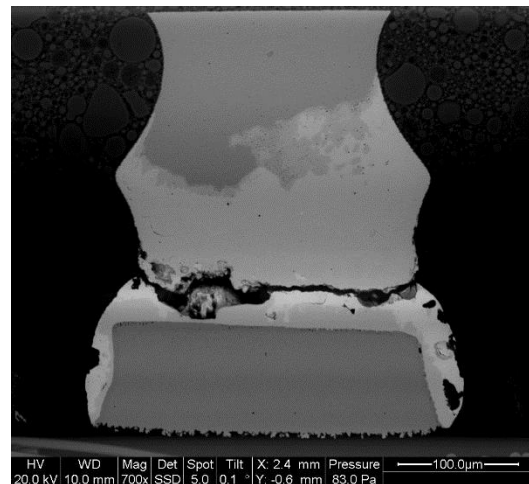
shows the failure of SAC305+0.07%Ce solder joints in QFN44 and R2512 packages. Figure 10-22 (a) and Figure 10-22 (b) show the solder joint of failed QFN44 in mechanical shock after 1000 hours of aging at 200°C. Both failed QFN44 solder joints confirm that failure occurred at the interface between  $\text{Cu}_6\text{Sn}_5$  interfacial IMC and bulk solder. Huge growth in  $\text{Cu}_6\text{Sn}_5$  interfacial IMC can be also seen in Figure 10-22 (b), along with excessive voids formed at the interface during high temperature aging which reduced interfacial strength even further. With presence of large interfacial voids and thicker  $\text{Cu}_6\text{Sn}_5$  interfacial IMC, Low Ce solder joint failed at the solder interface during mechanical shock testing. This result confirms lower
